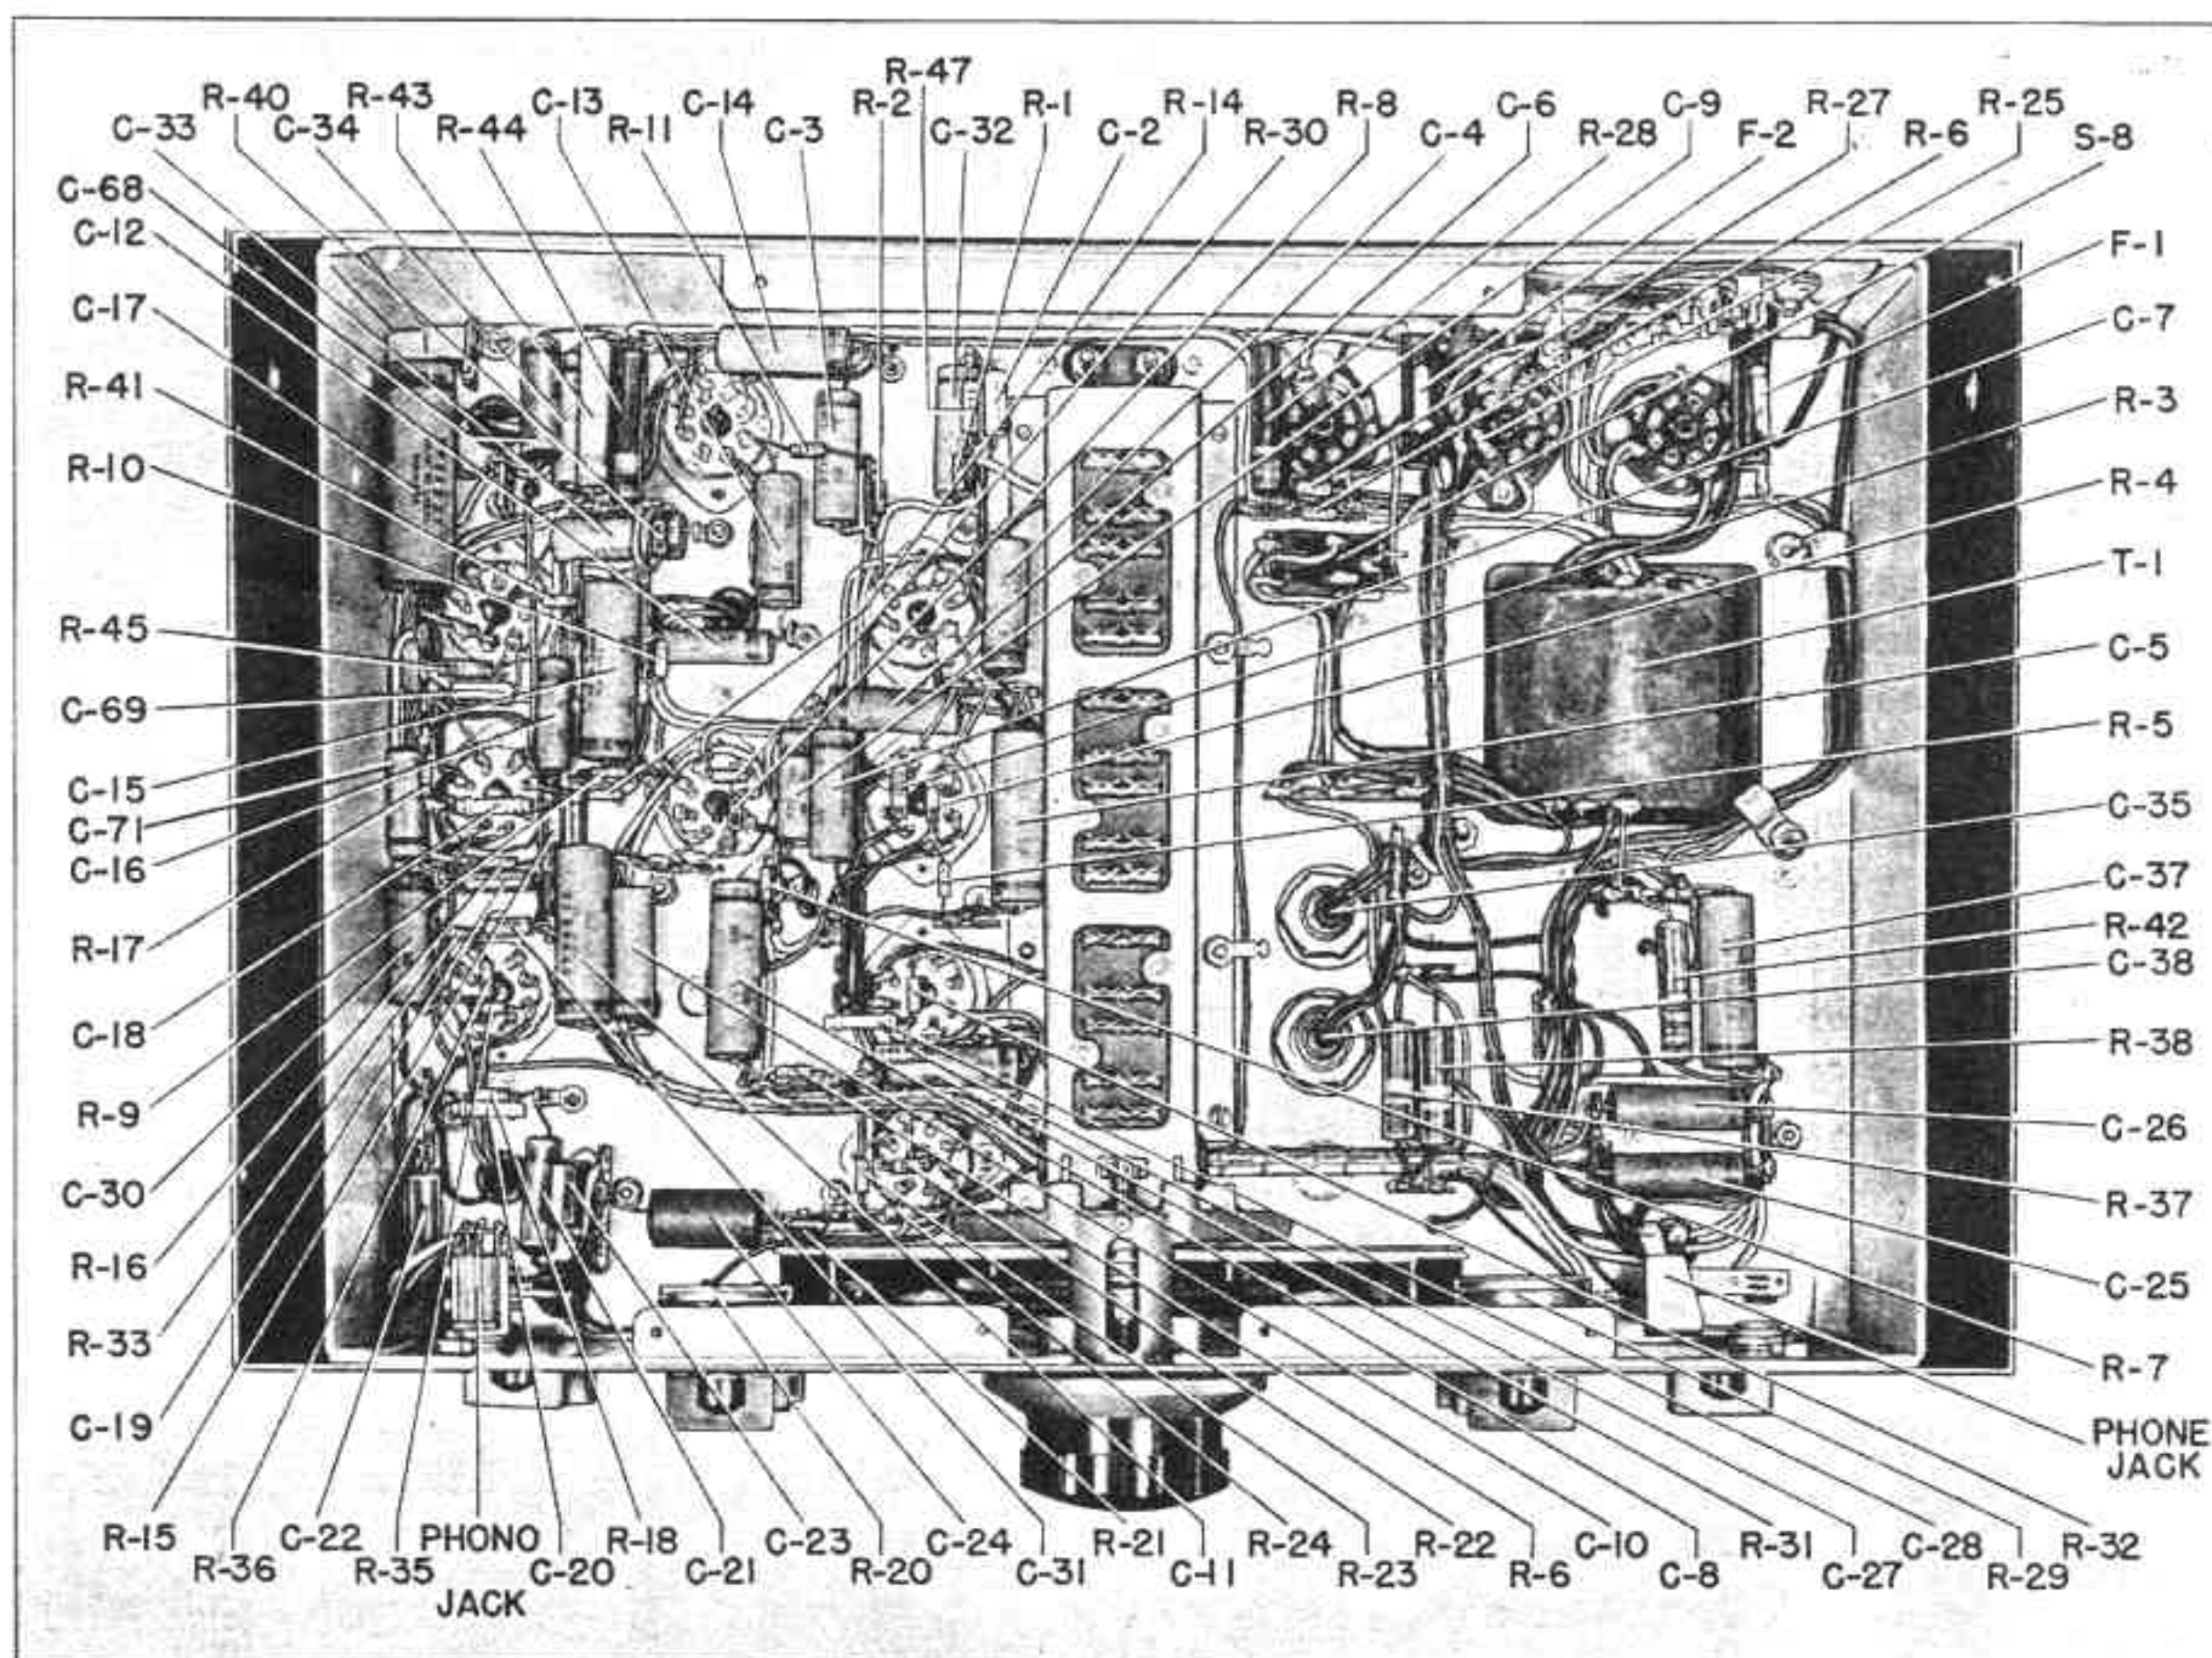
Bottom View of Receiver with Coil Carriage Removed
